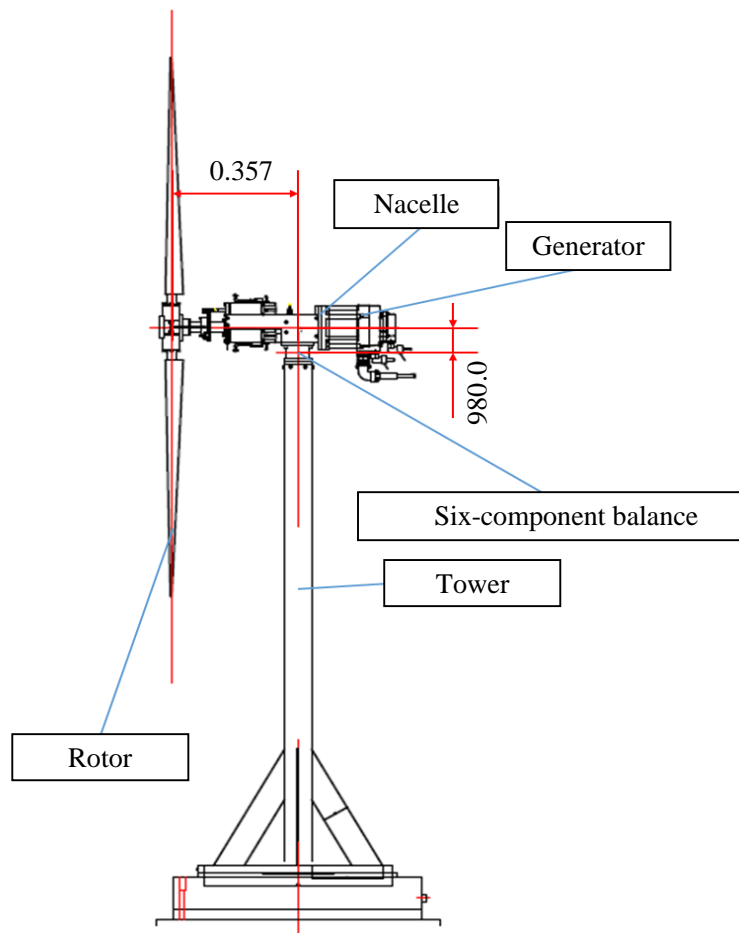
Schematic drawing of wind turbine and six-component balance
